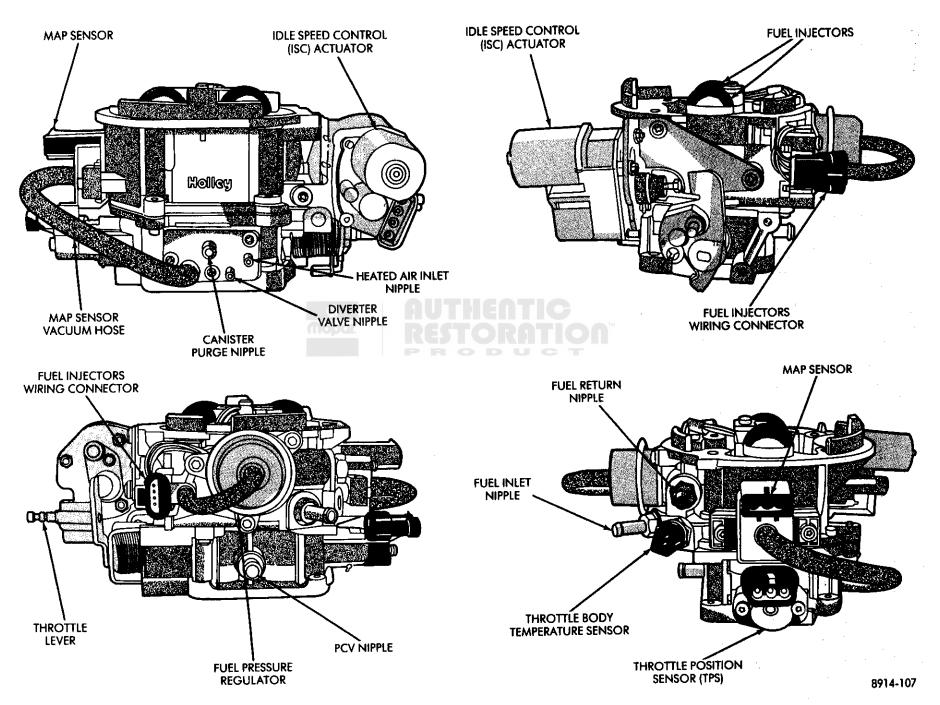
Throttle Body Assembly - 5.2L and 5.9L Engines
